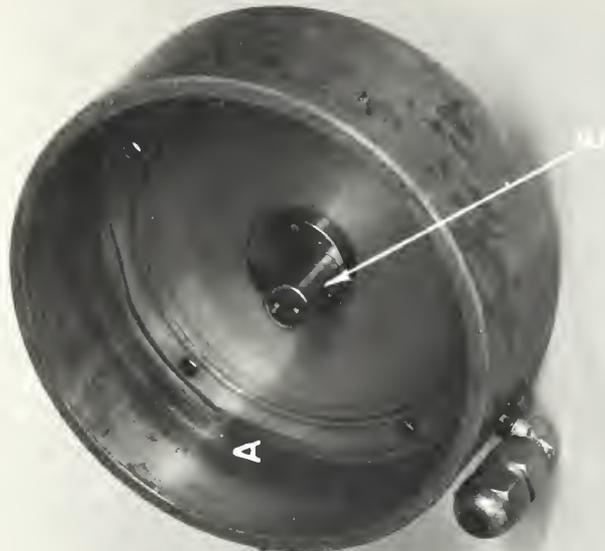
shows the journal bearing for the crankshaft at A, retainer C, and thrust ball bearing B. One rubber "O"-ring and
